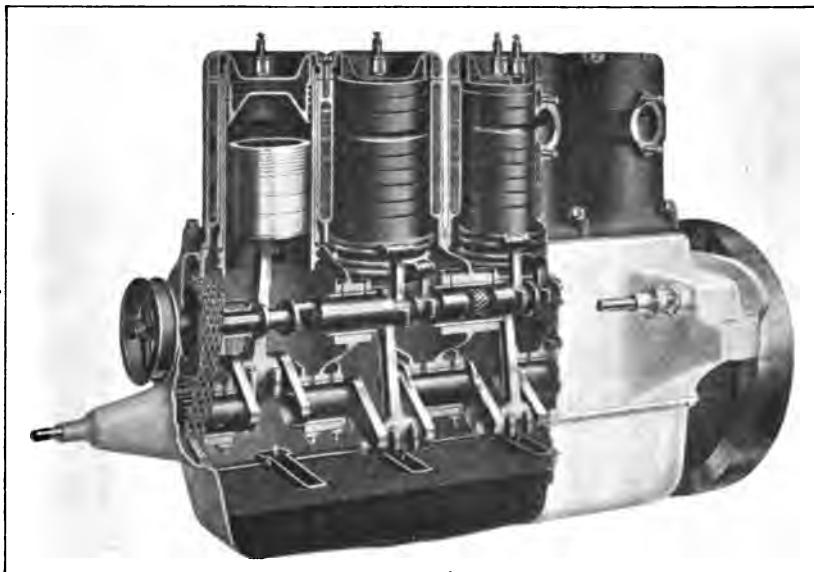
Columbia Knight Motor, Showing Sleeve-Valve Arrangement.
